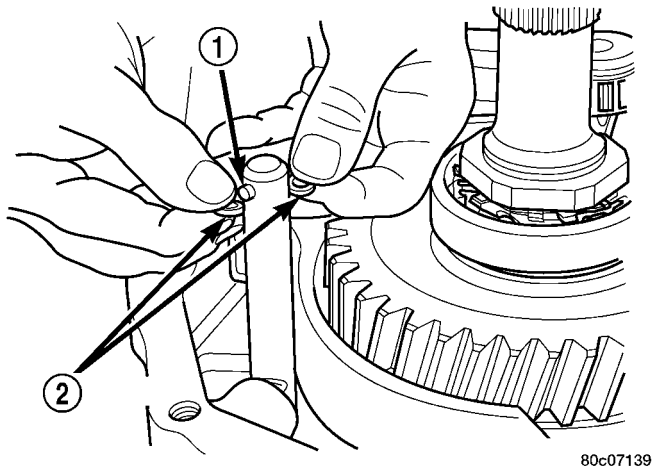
REVERSE IDLER AND COUNTERSHAFT GEARS
